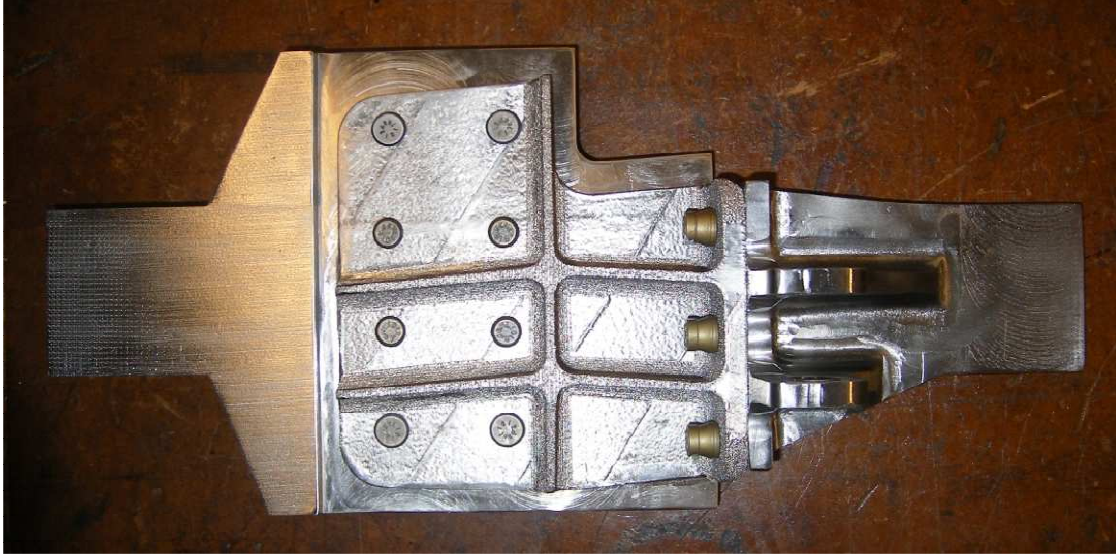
Fixture and Specimen Assembled with Fasteners
